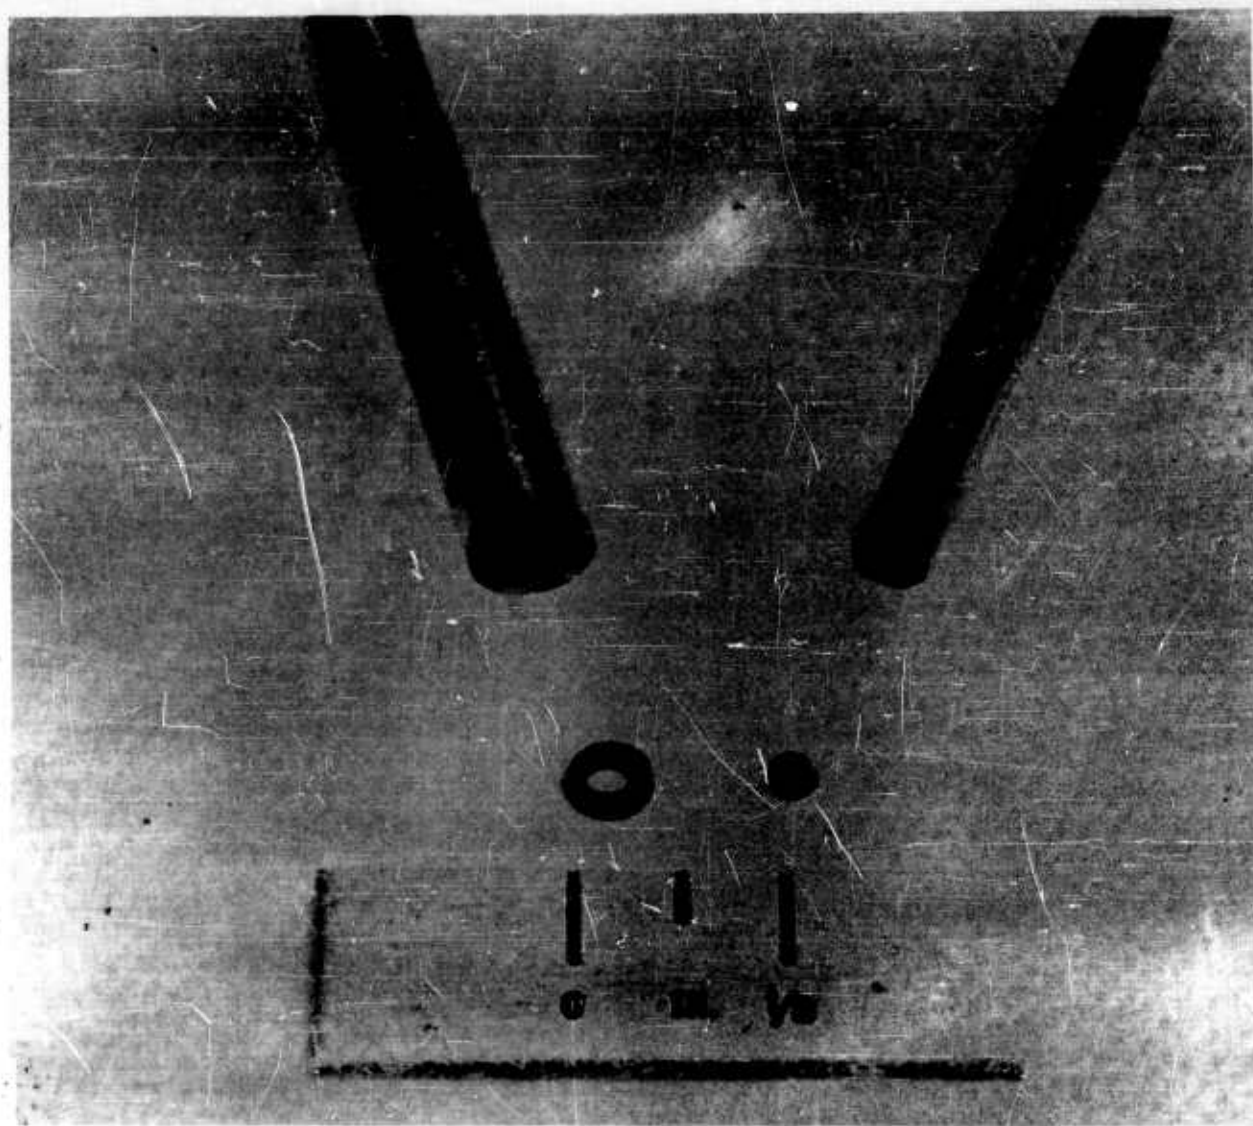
Fabrication details of tool employed in impact grinding of Hall measurement specimens (see Figure 5 - right).
